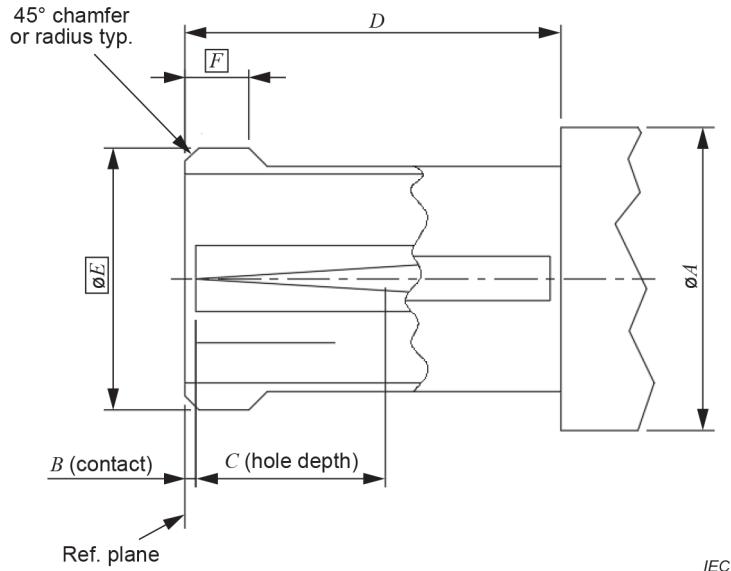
SMPM connector with pin-centre contact – Smooth bore (for dimensions, see Table 2)
